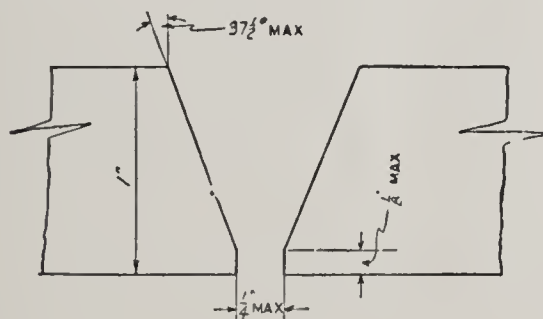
(b)—Alternate Butt Joint for Plate 1 In. Thick (May be Used for the Oxyacetylene Process Only)
